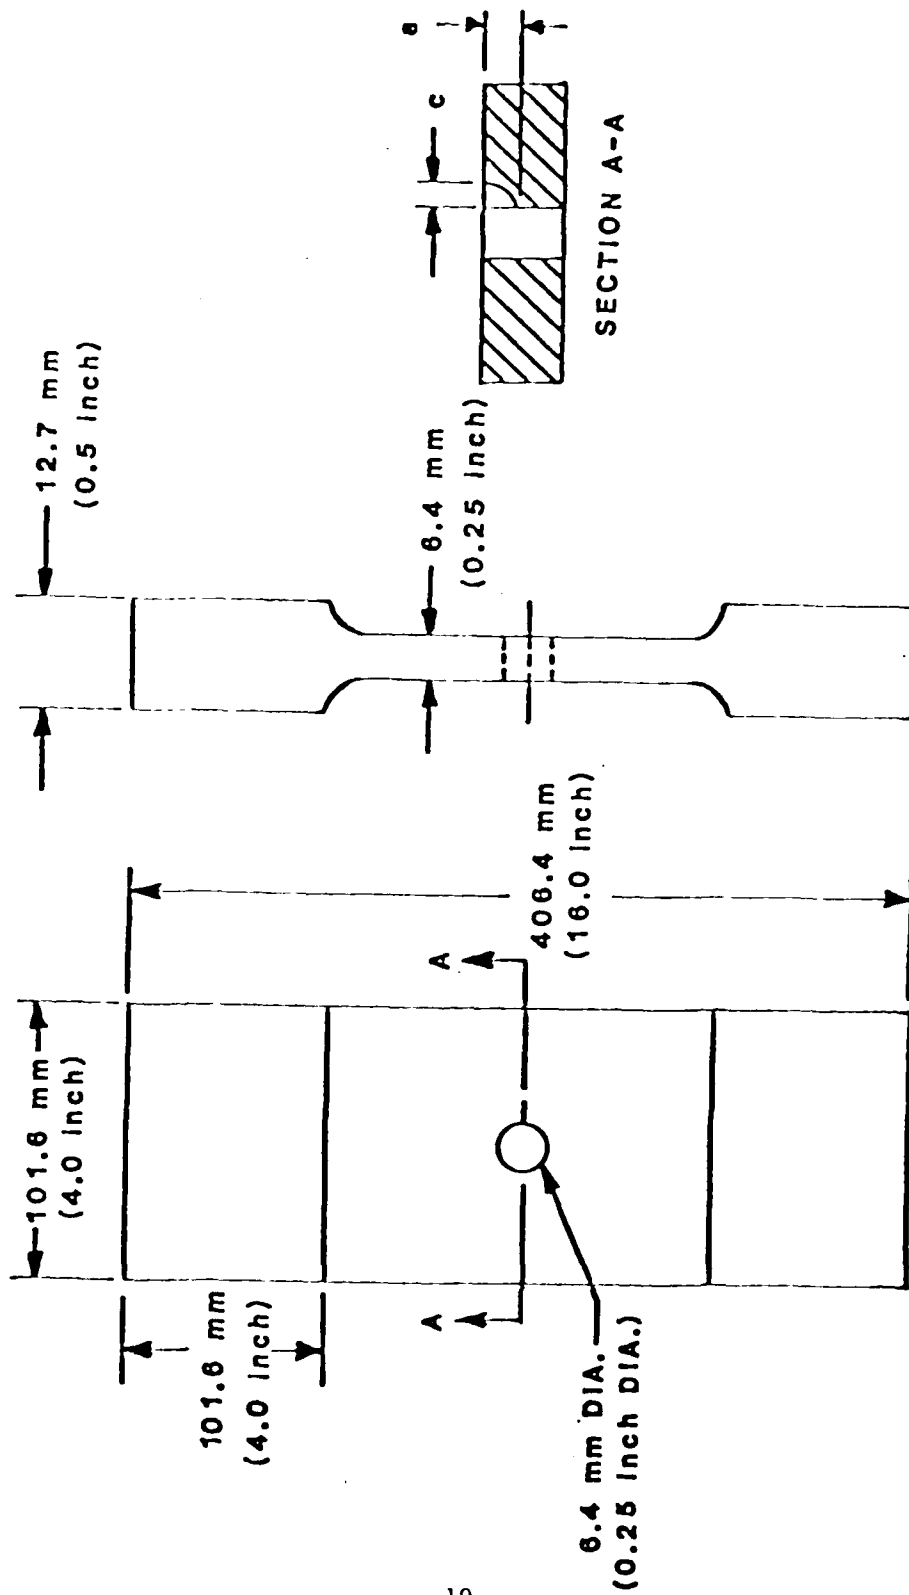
Specimen Geometry Used for 7075-T651 Aluminum Testing
